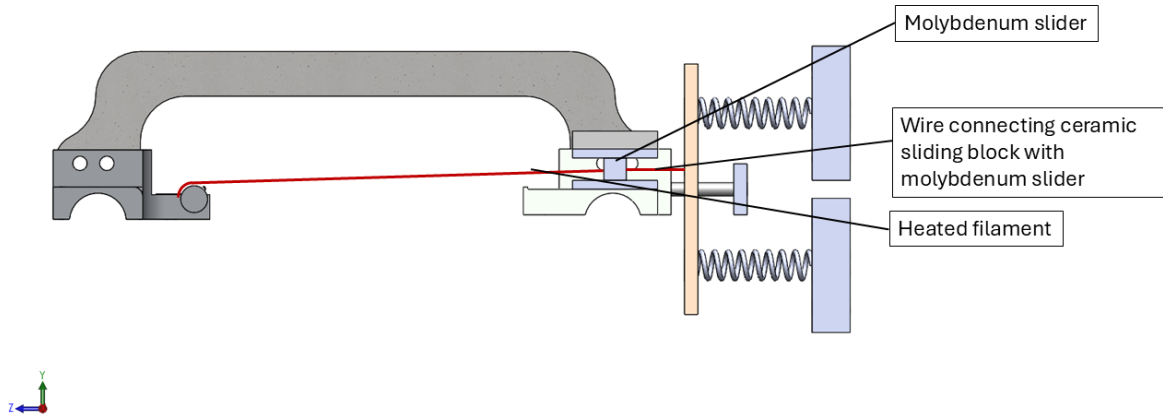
Section view in the YZ-plane of the straightening mechanism CAD design.
